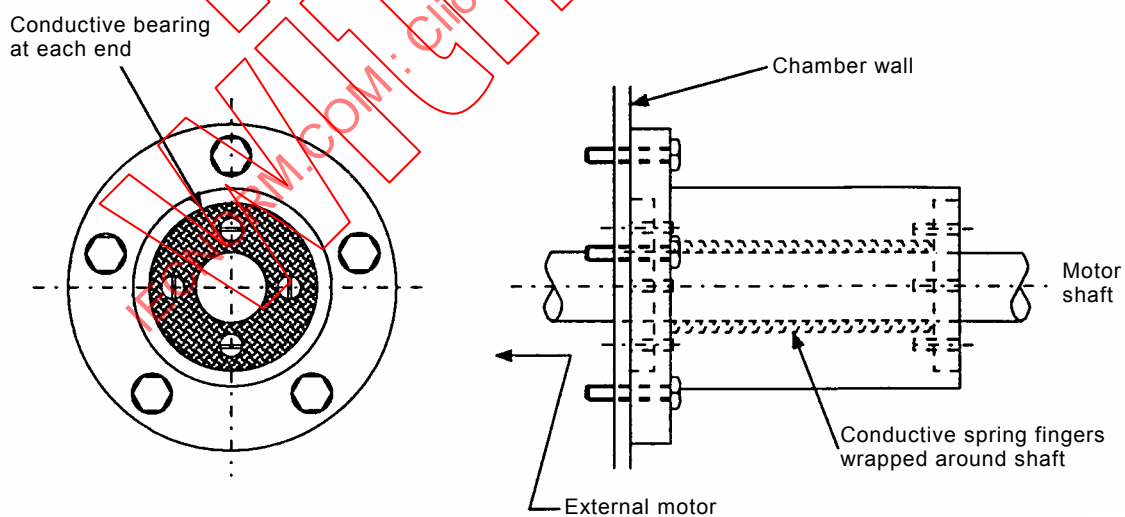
Details of collet for mounting tuner shaft to drive motor through the wall of the test chamber
